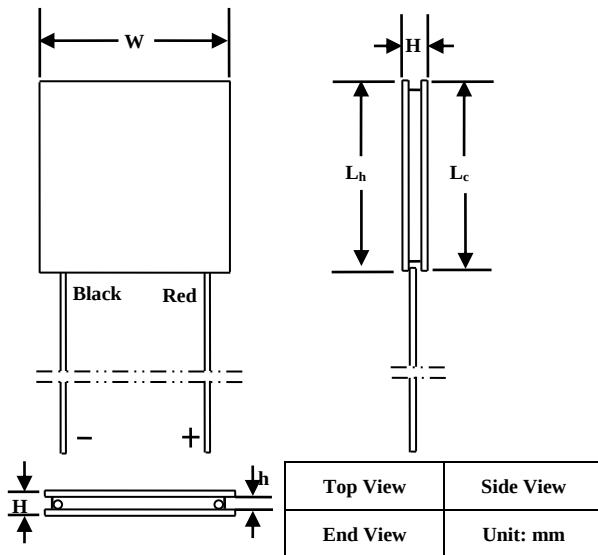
Mechanical Dimensions of Sealed ATE1-71
